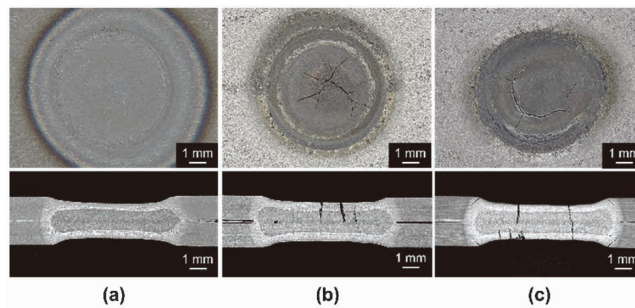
Surface and cross-section images of welds (a) without LME crack, (b) with type A crack, (c) with type A+B cracks
